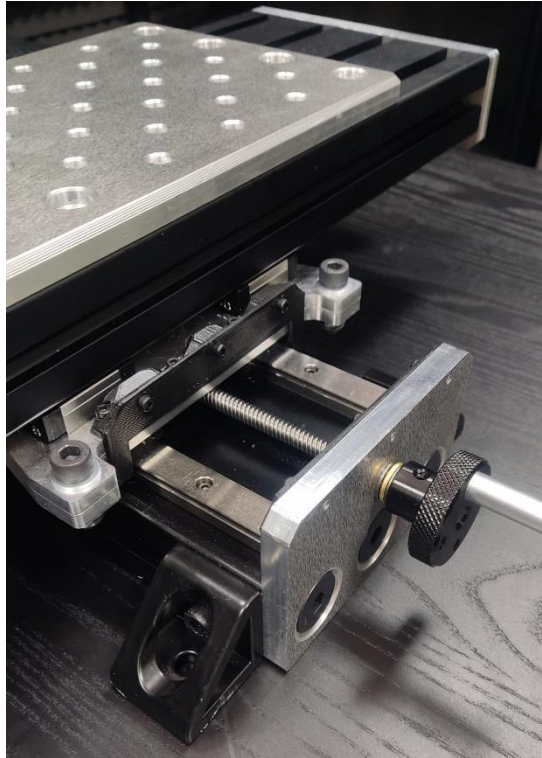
Front of the Mill, where the Y front plate is installed with the bearings, jog wheel, full gantry plate assembly and fixture plate on top of the X extrusion.
